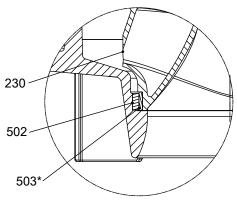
Version with casing wear ring and impeller wear ring (optional)
